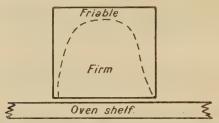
Cross-Section of Tensile Test-Piece Bonded with Petroleum Extract.
